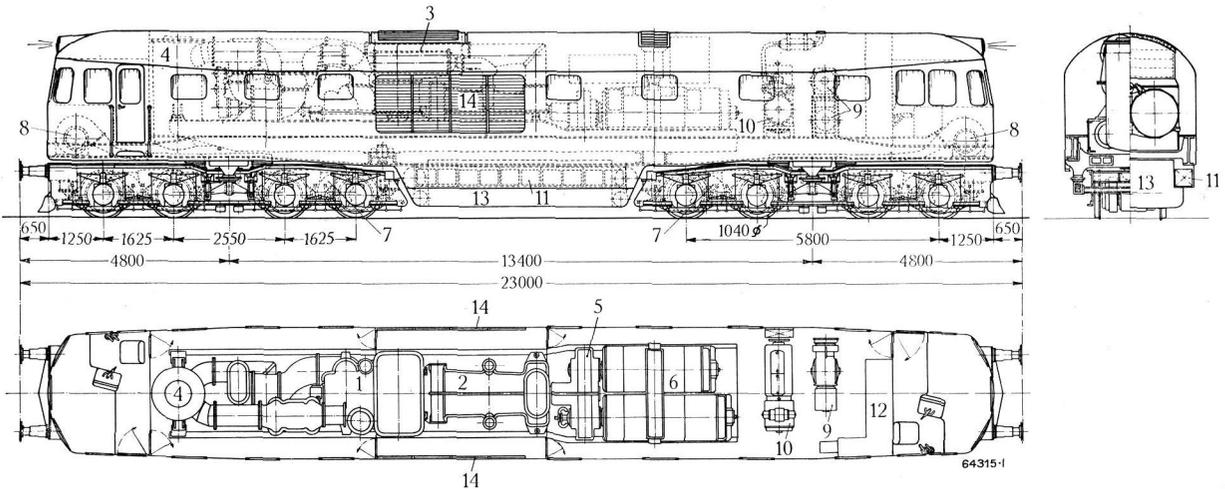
4000 H. P. gas-turbine locomotive.
